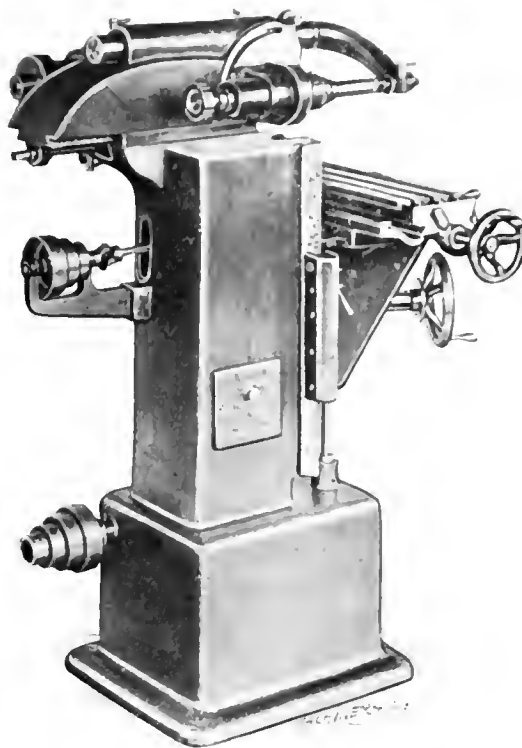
Van Norman Miller, arranged with Spindle Horizontal.
